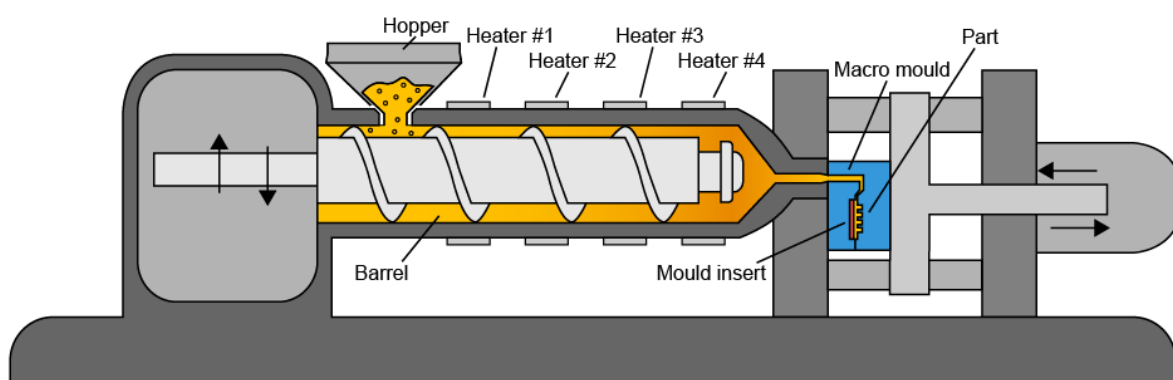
Schematic of the injection moulding machine showing the positions of the mould and other components. Figure adapted from Brendan Rockey, University of Alberta Industrial Design, for Injection Molding Wikipedia article.
